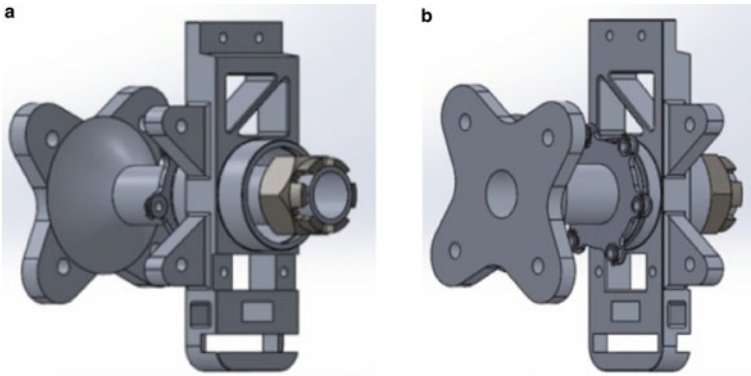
a Inner side of wheel assembly. b Outer side of wheel assembly
